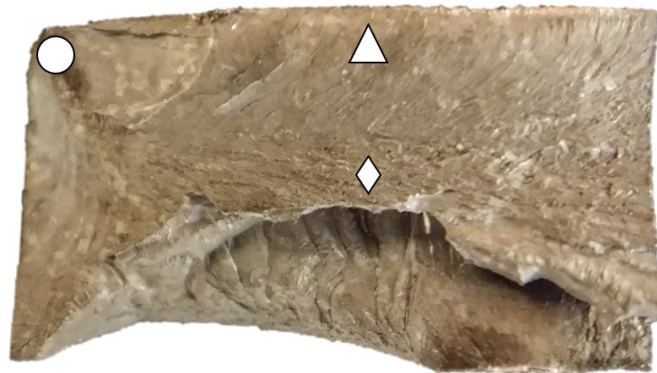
Photo of Caldie side press fracture surface
